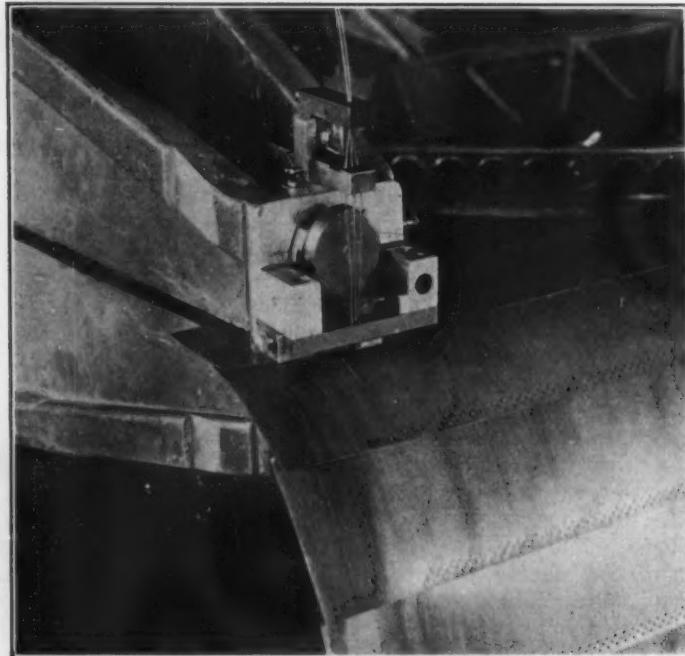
AUTOMATIC RIVETING MACHINE IN OPERATION
